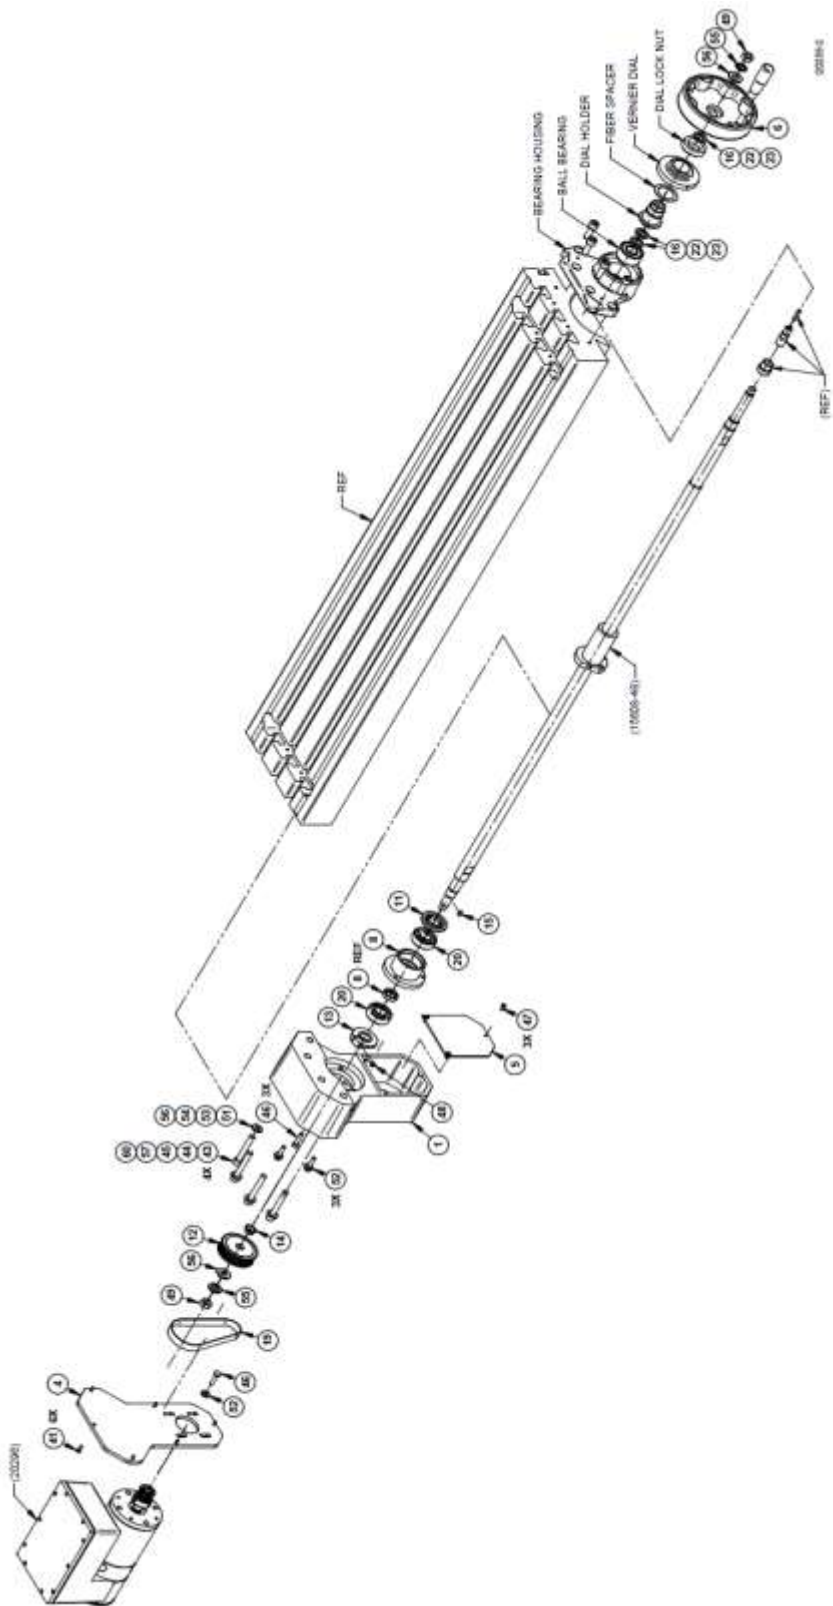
X-Axis Drive Assembly -P/N 20255-2
